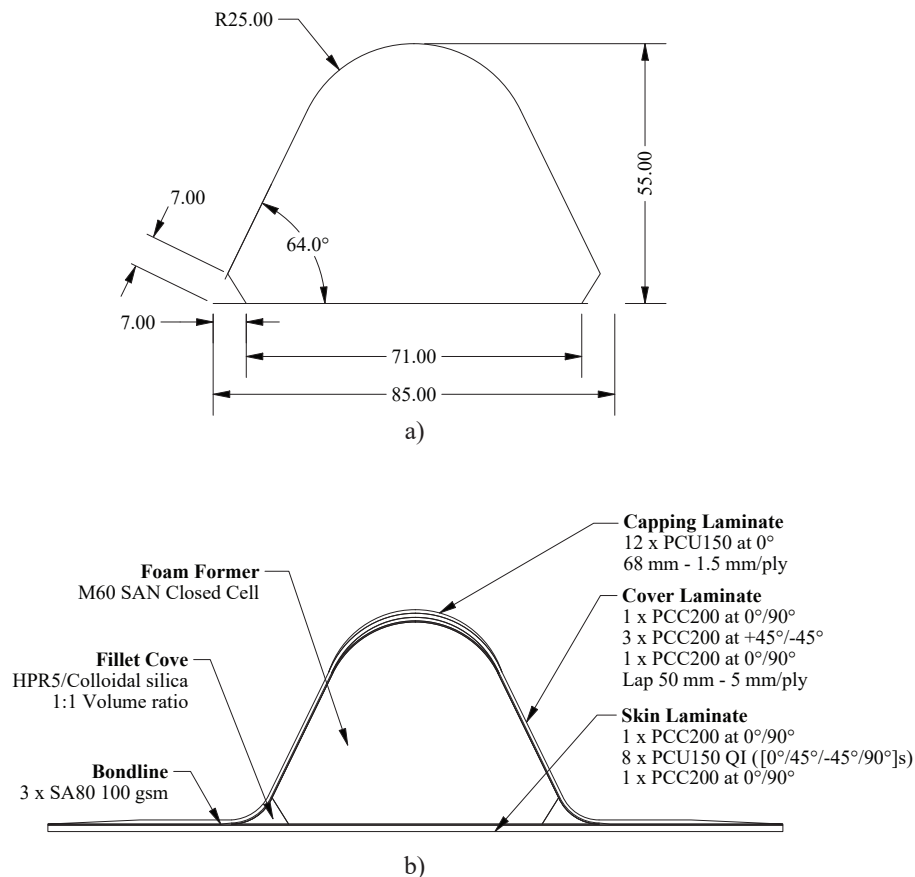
SSCP cross-sectional geometry and laminate details a) Stringer foam former cross-sectional dimensions, b) Laminate lay-up details. All dimensions are in millimetres [mm].
